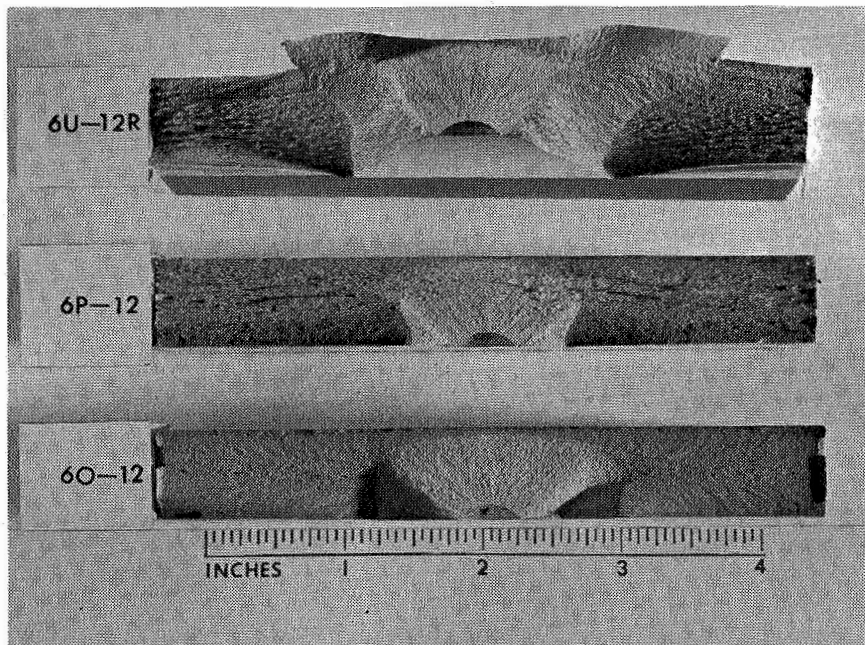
Macroscopic view of surface-flawed fatigue specimens
